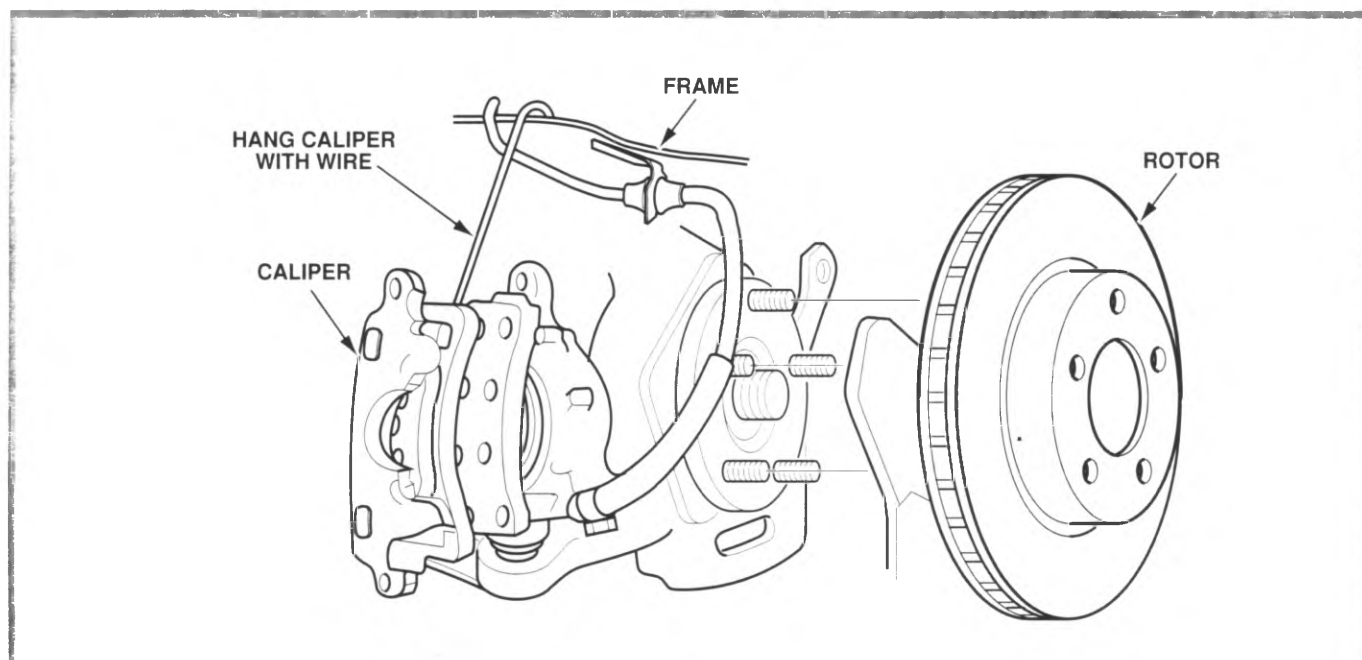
, Replacing Disc Brake Rotor (4WD)
